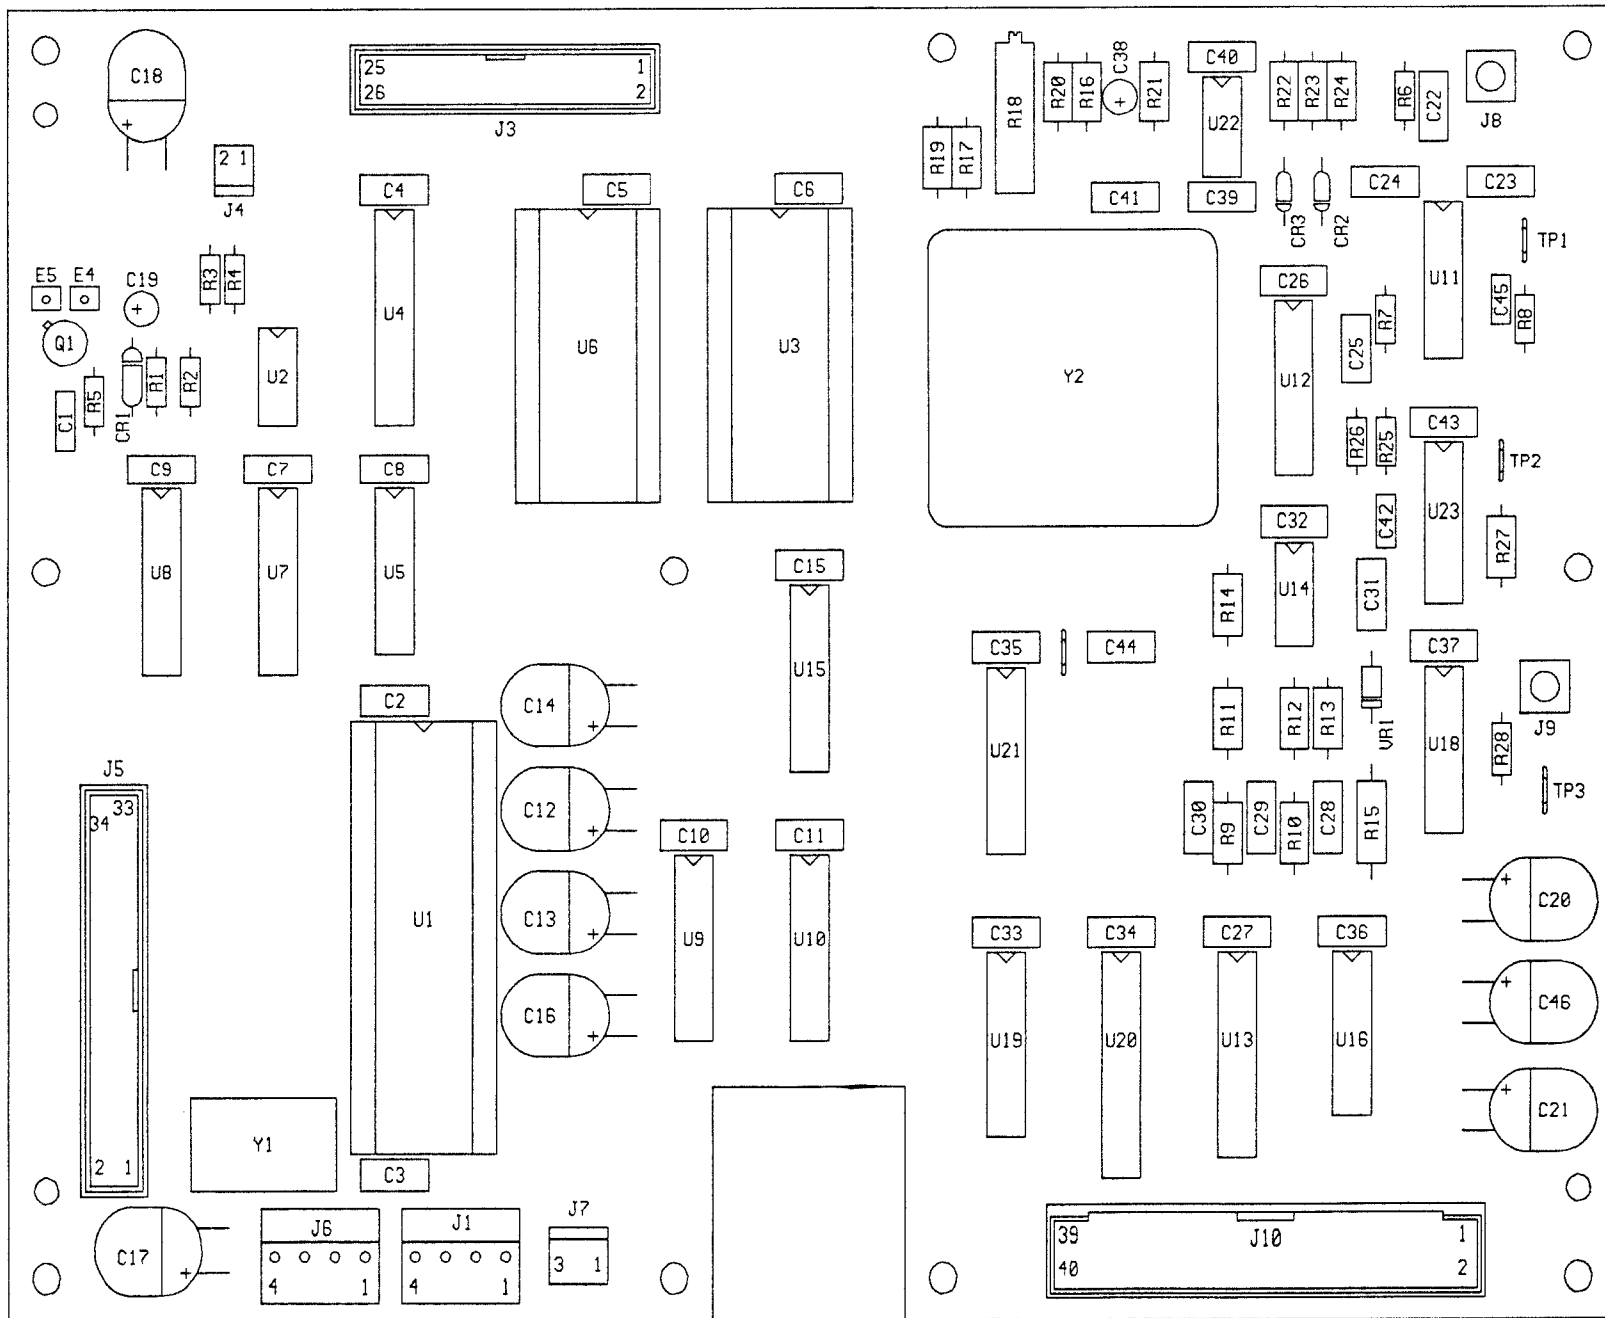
Logic/Clock PWB Assembly A11A1 Component Locations (10133-1850, Rev. B)
